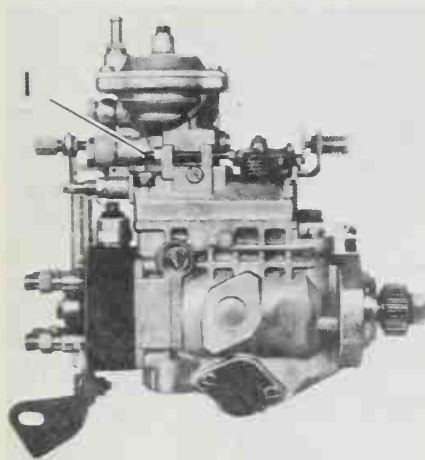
Low idle speed on Bosch fuel injection pump is adjusted by turning screw (I).
